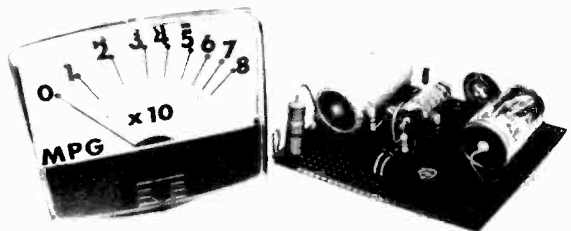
Layout of the components on the Vero-board. This panel is mounted directly on the meter. Holes should be drilled to suit meter
